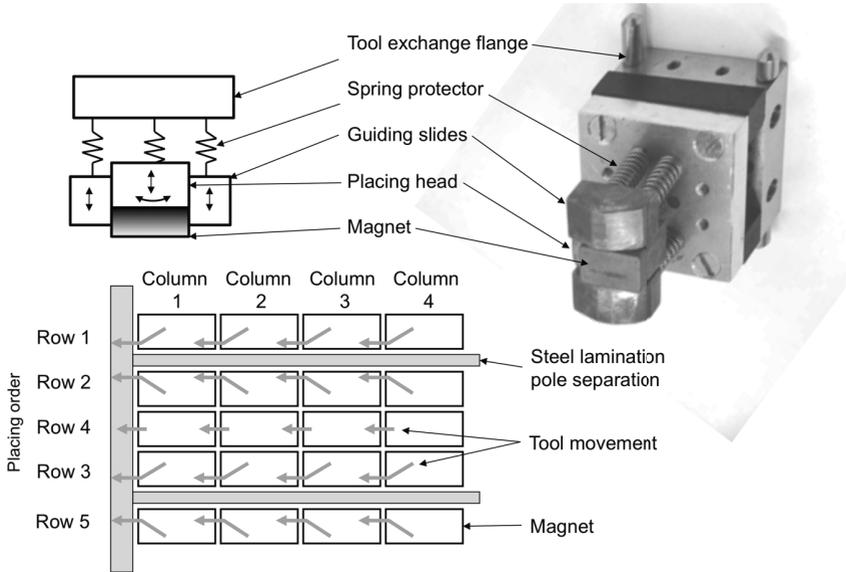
Top: PASMAG-1: A passive mechanical gripper can be used for placing magnets. Bottom: The path planning for a rotor surface with three poles is given.
